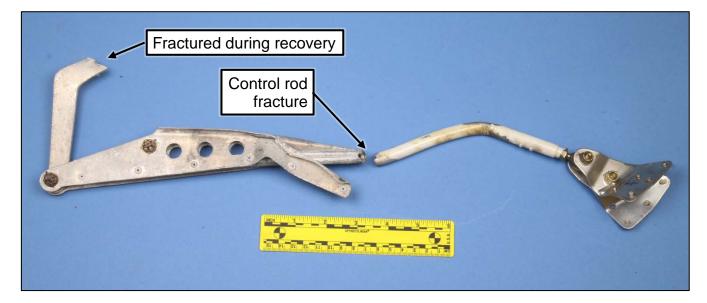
Overall view of the submitted elevator trim actuator control assembly.
